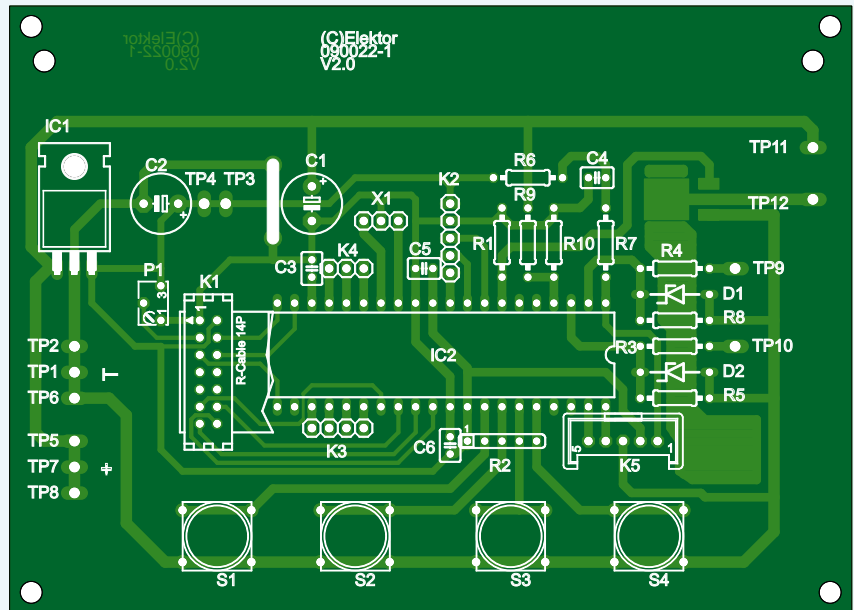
Fitting the components will be no problem on this single-sided PCB.
